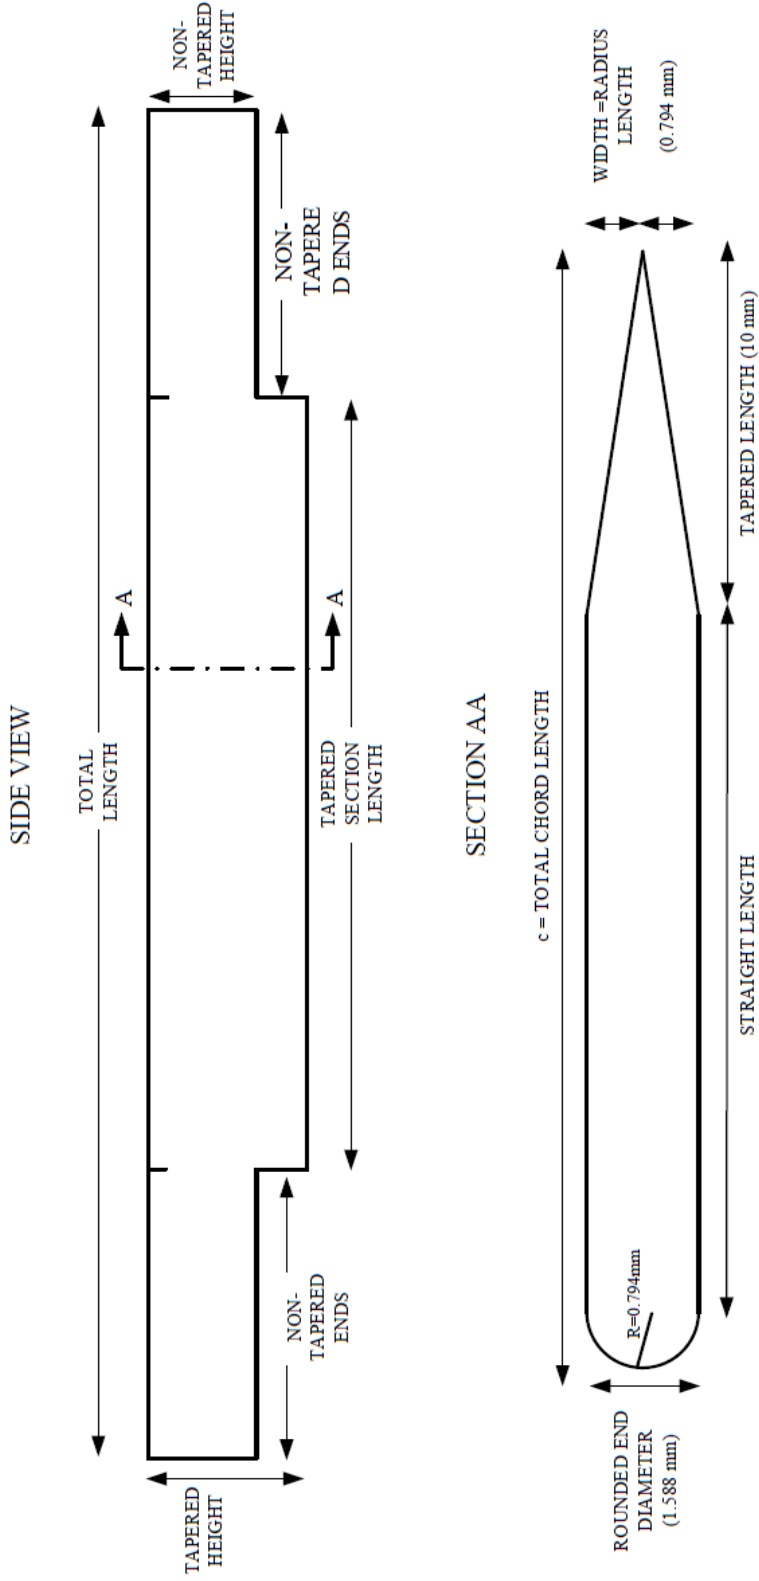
b, Engineering drawing of 1.25 cm louvers.
